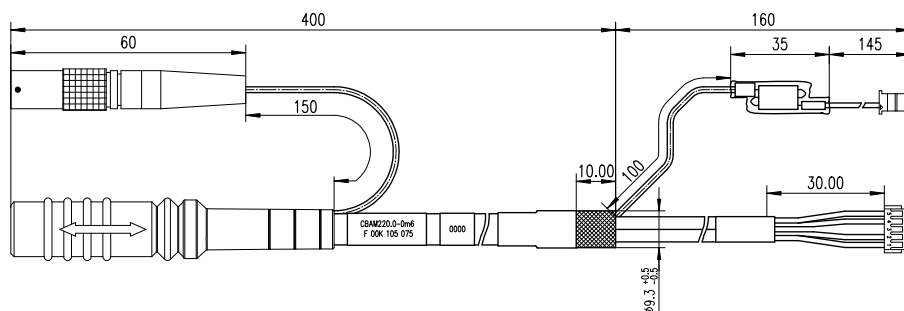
Combined Interface and Power Supply Cable CBAM220
